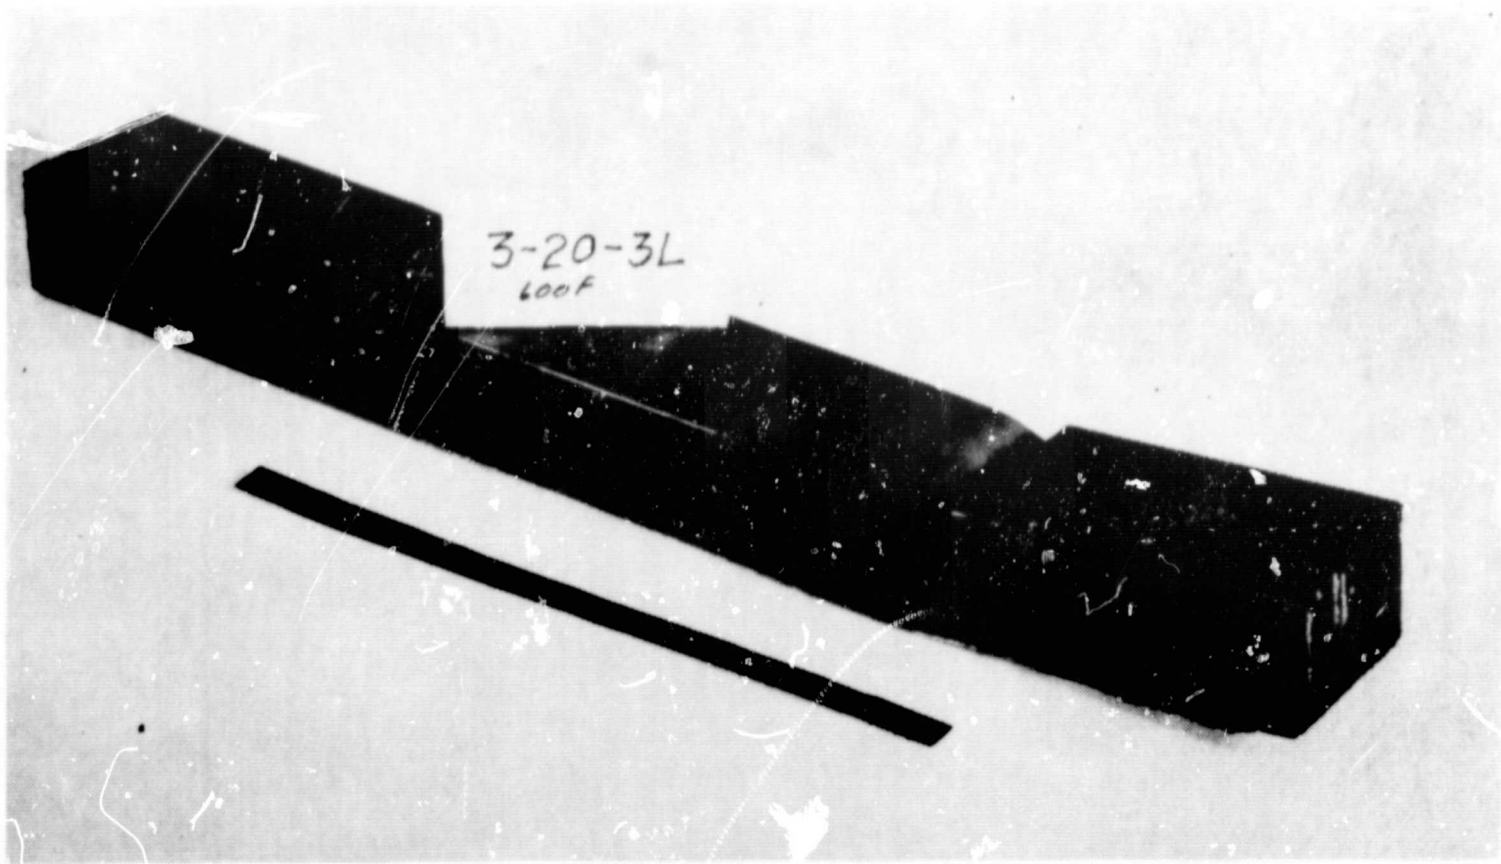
Core crushing and face sheet compression failure before reducing couple arm.
